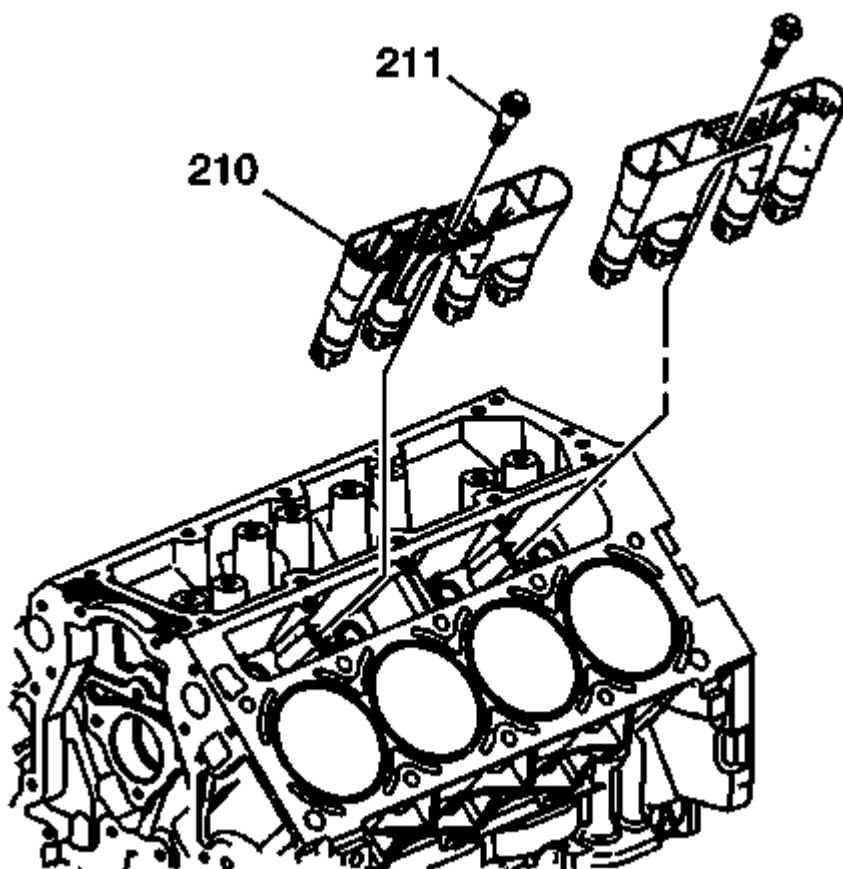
Valve Lifter Guides, Cylinder Head & Bolts
